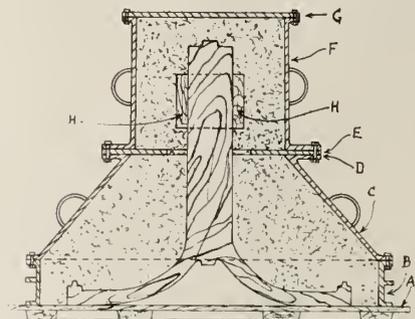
PATTERN MOULDED ON FLOOR BOARD READY FOR TURNING OVER.
